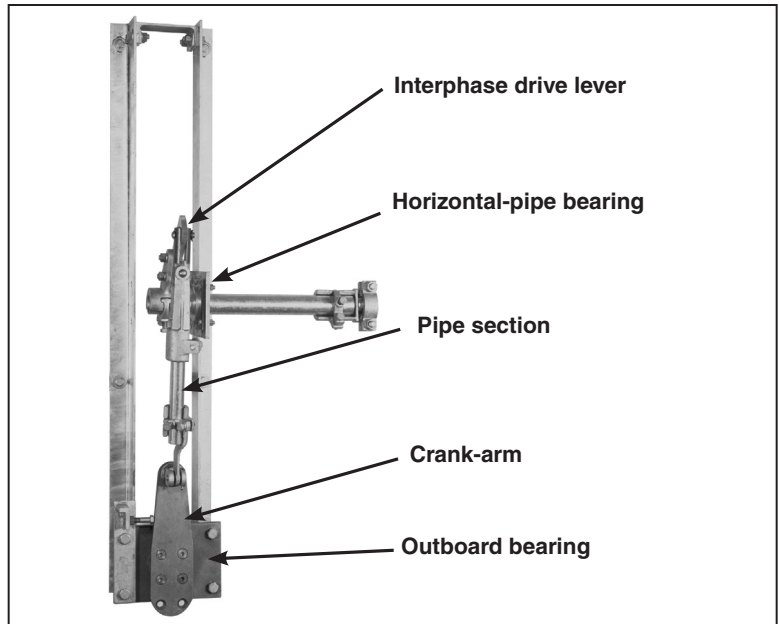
Adjust the effective length of the pipe section interconnecting the outboard bearing crank-arm and the interphase drive lever.
